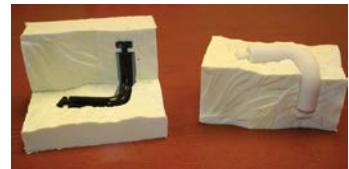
The finished RTV mold with the pattern placed in the mold (left) and soluble core inserted (right)
